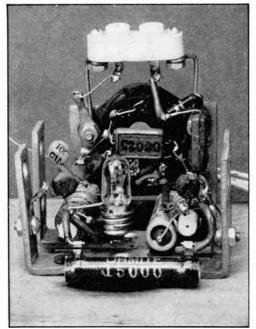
The novice transmitter just before mounting the variable condensers and coil. All wiring is complete except for connecting one side of C_7 .
